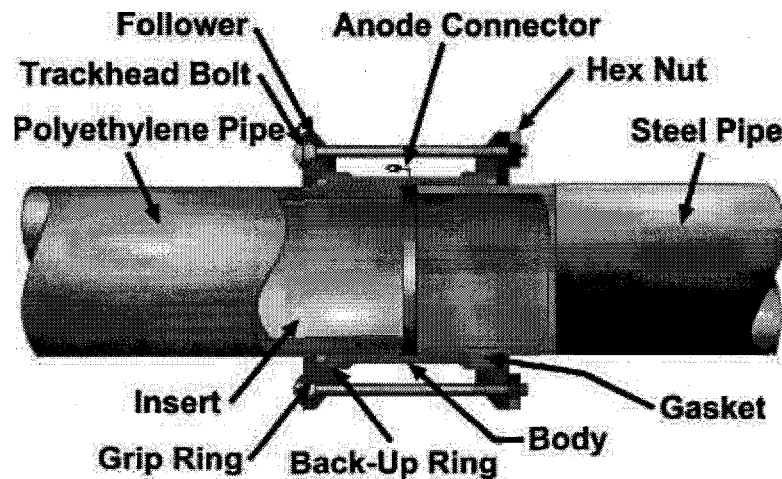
Bolt Type Mechanical Coupling for Joining Steel Pipe to Polyethylene or for Joining Two Polyethylene Pipes
